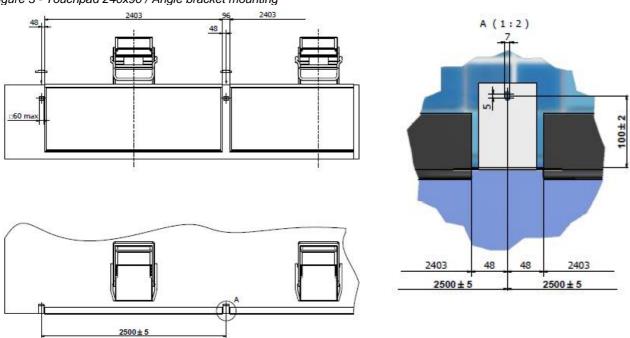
Touchpad 240x90 / Angle bracket mounting
